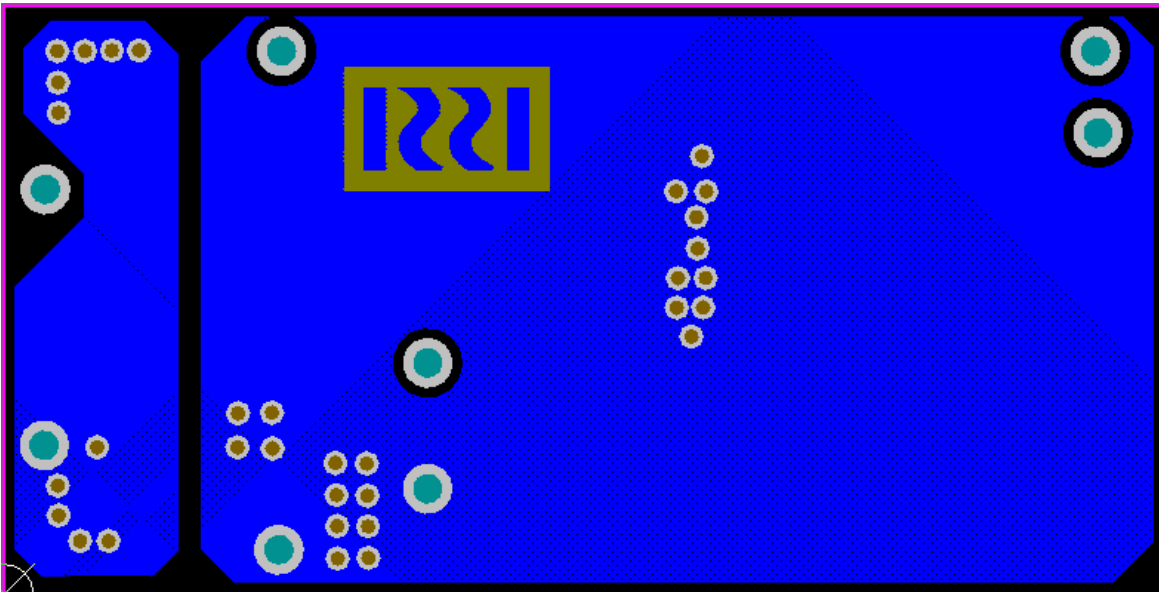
Evaluation Board PCB Layout-Bottom Layer
